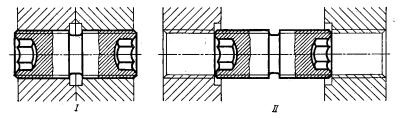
Assembling with bolt having threads of opposite hands *I*—after assembly; *II*—before assembly
